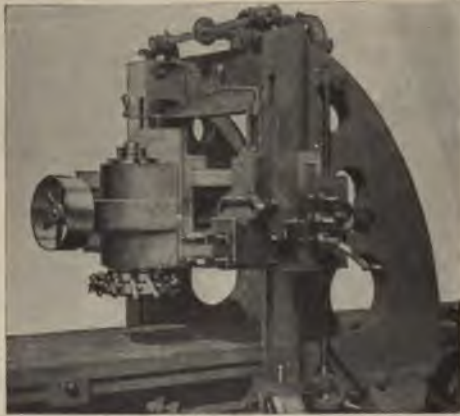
SHOWS NO. 3 ATTACHMENT.
